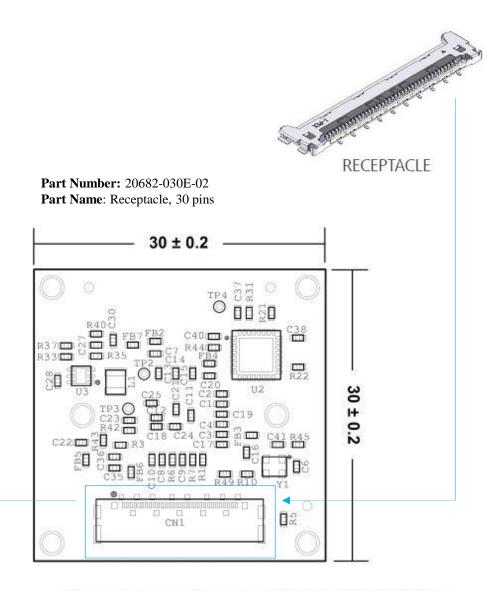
Bottom View of e-CAM222_CUMI2311_MOD
